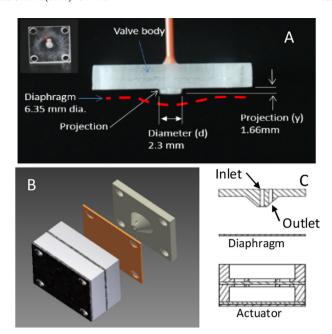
(A) Valve seat for normally closed valve design. (B) Assembly drawing for valve. (C) 2D drawing for slightly modified valve seat (\sim 120°).
